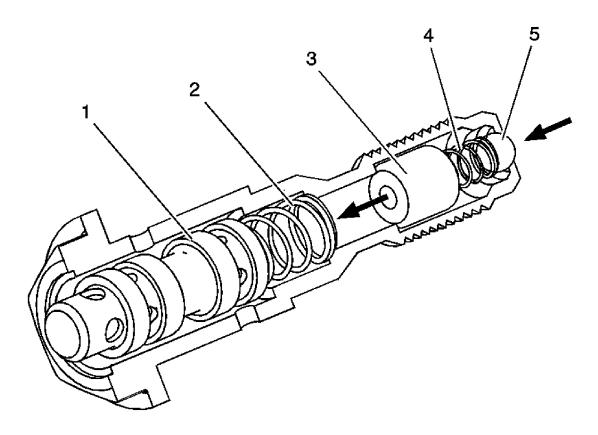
CMP Actuator Solenoid Valve Components Courtesy of GENERAL MOTORS CORP.
